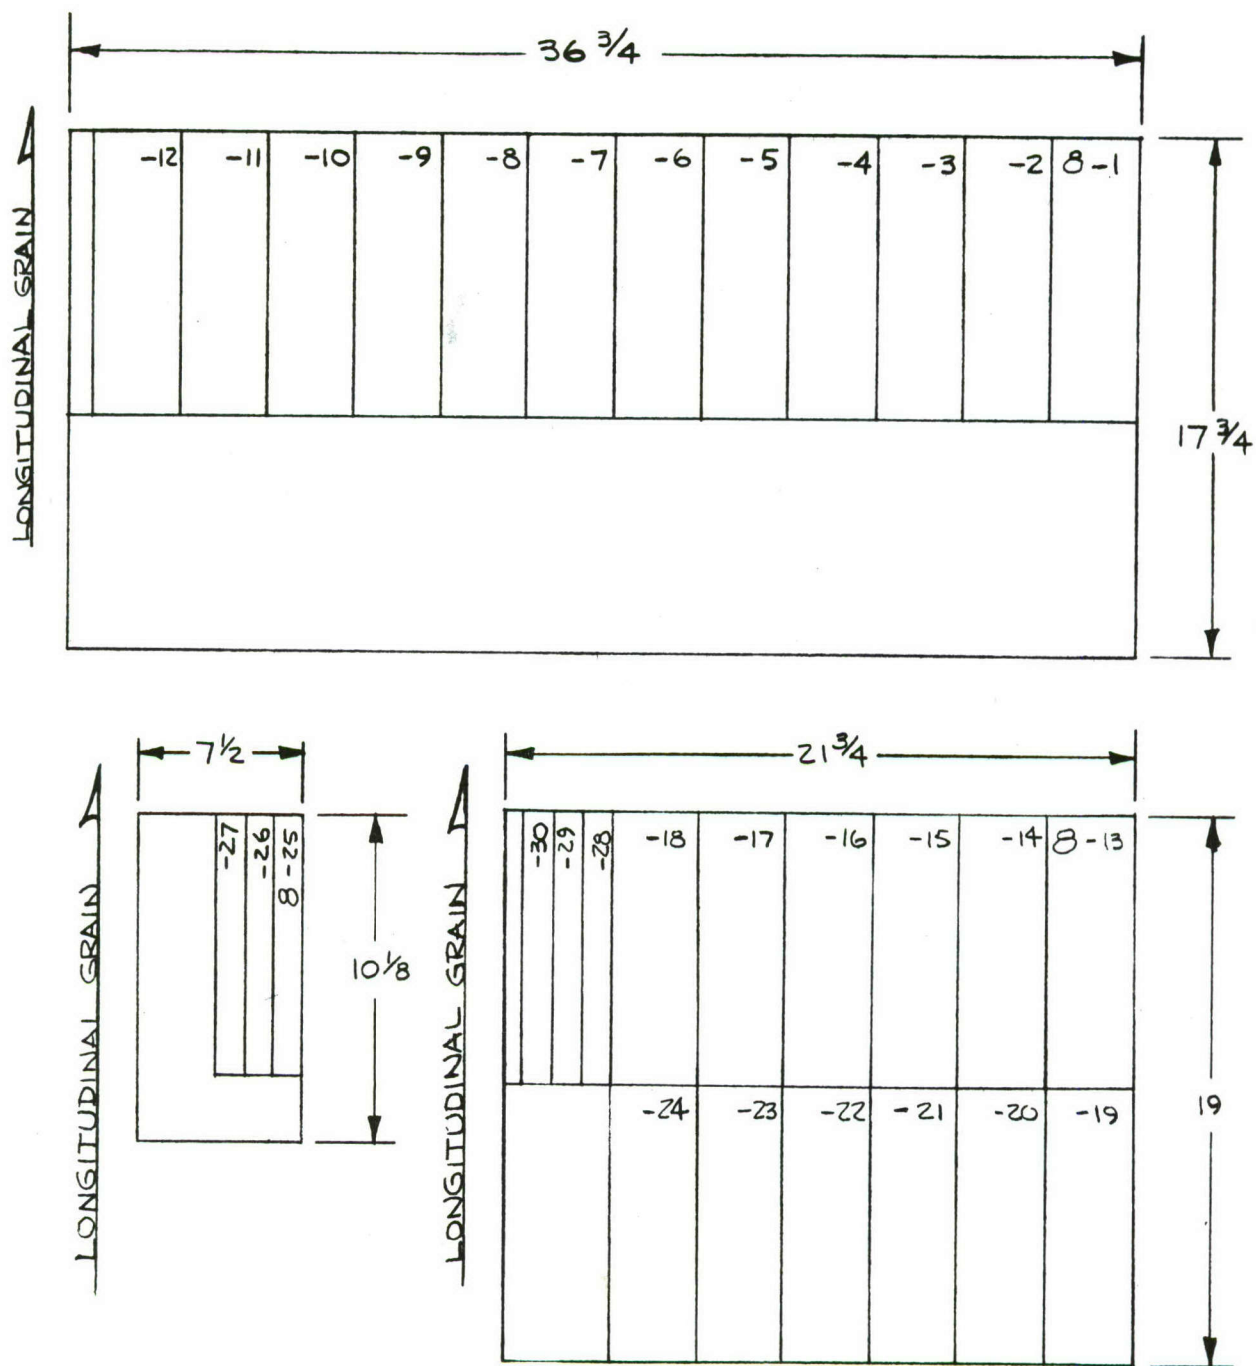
Specimen Layout for Ti-8Mo-8V-2Fe-3Al .125" Thick Sheet
